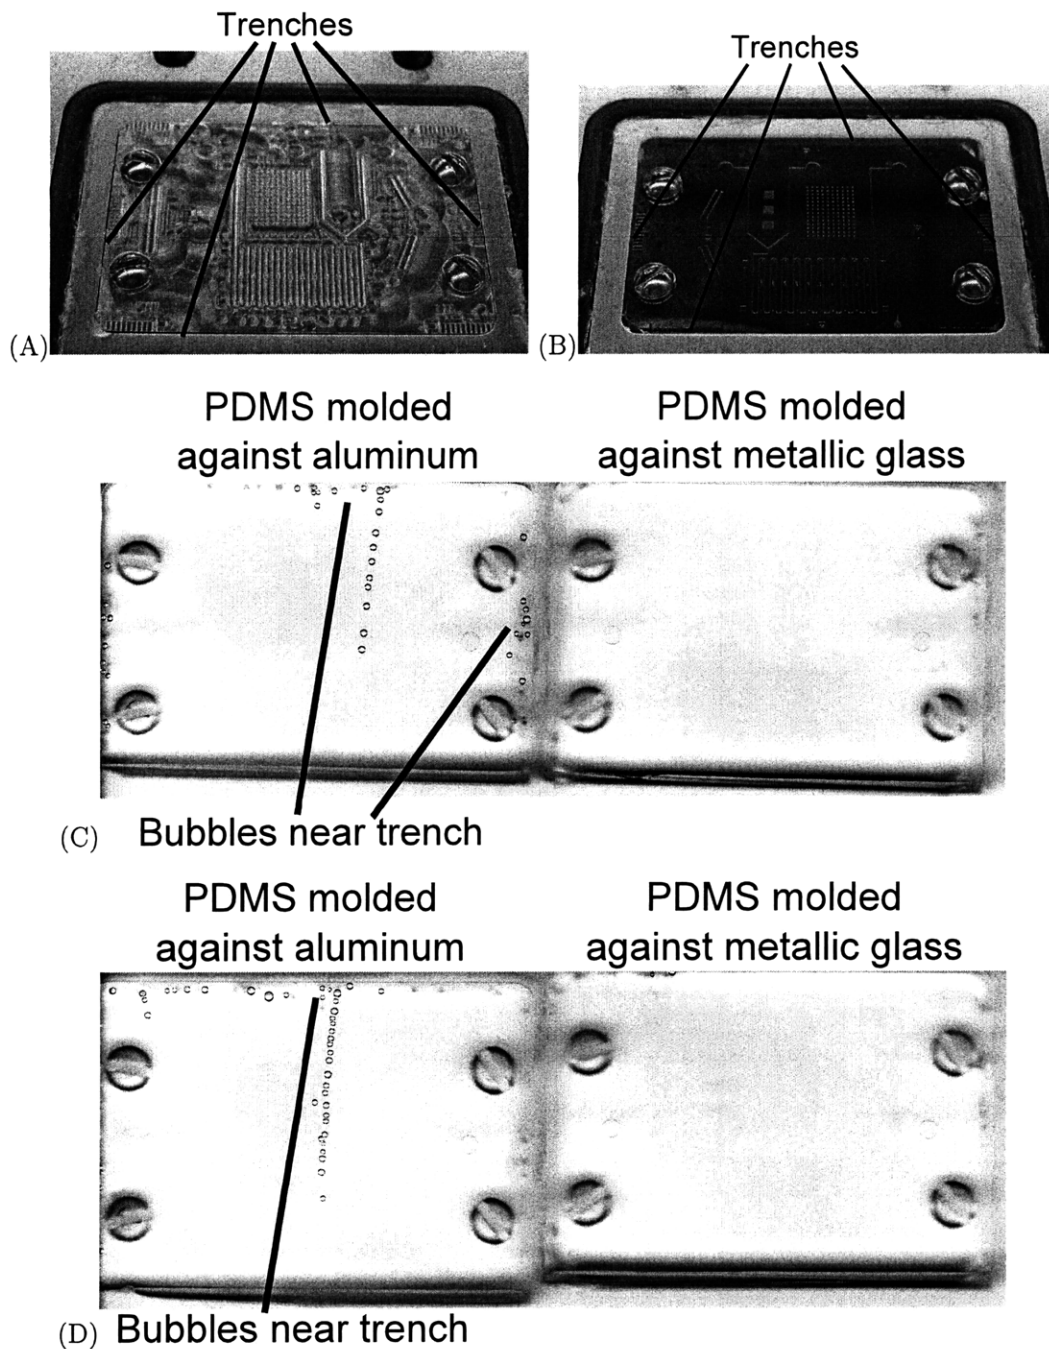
(A) Micromachined aluminum tool with very narrow trenches between the mold insert and the surrounding mold assembly. (B) Bulk metallic glass tool with larger trenches than those shown in A. (C) PDMS parts cast against the molds shown in A and B with a spin time of 4.5 minutes. (D) PDMS parts cast against the molds shown in A and B with a spin time of 30 seconds.
